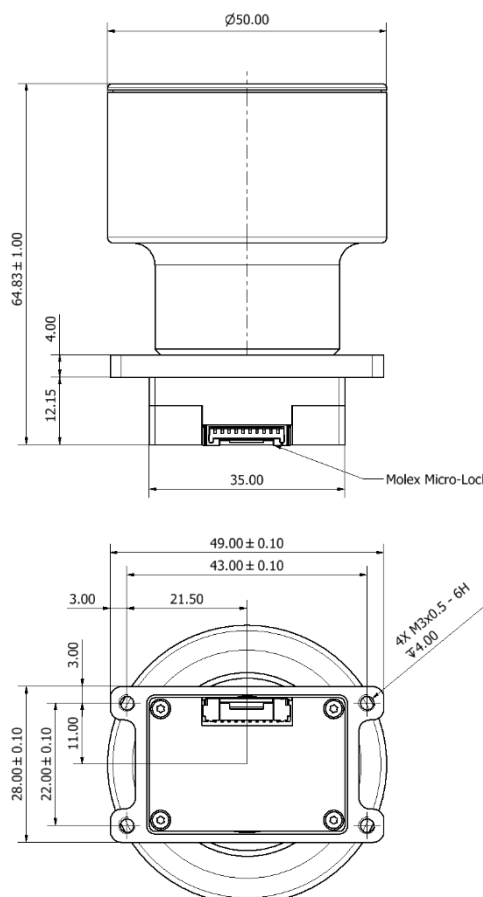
Indicative dimensions of CubeStar with baffle assembly
